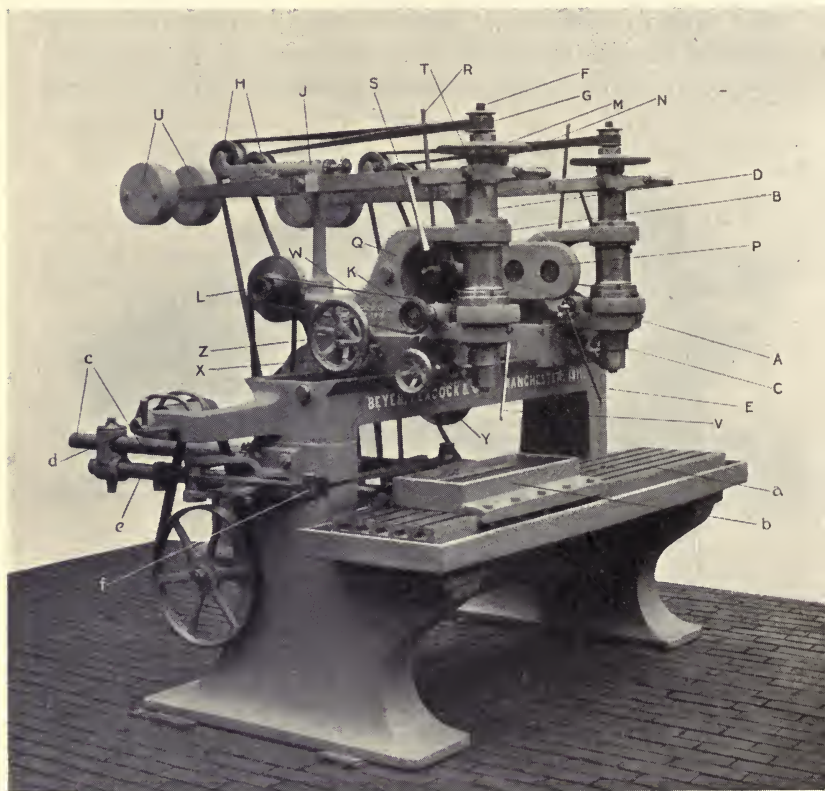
LINK AND HOLE GRINDING MACHINE—BEYER, PEACOCK & CO.
